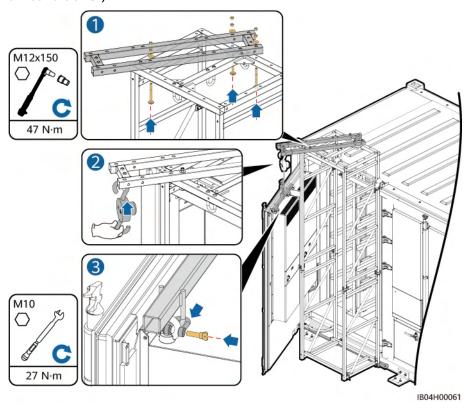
Installing the air conditioner hanging truss (replacing the outer air conditioner)
